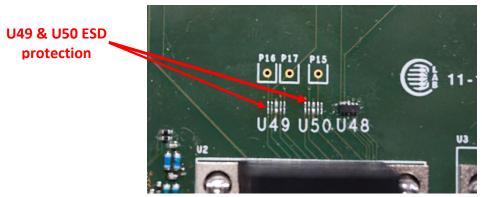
Removed U49 & U50 ESD RCLAMP components.
